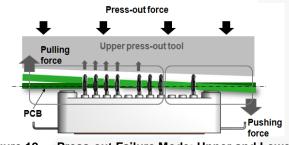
Press-out Failure Mode: Upper and Lower Press-out Tools Not Parallel
